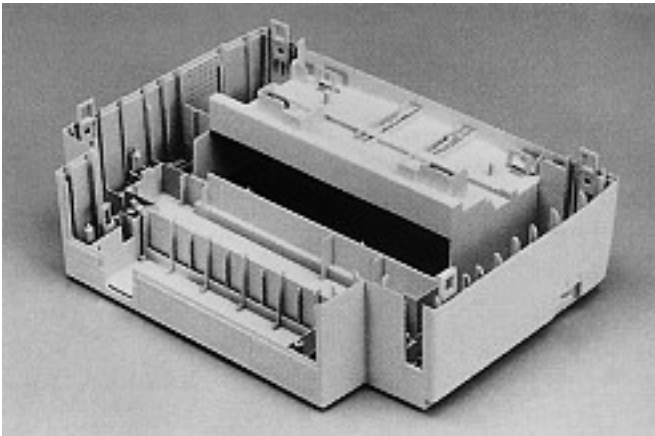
Fax machine lower housing (photo courtesy of Canon Corp.)
